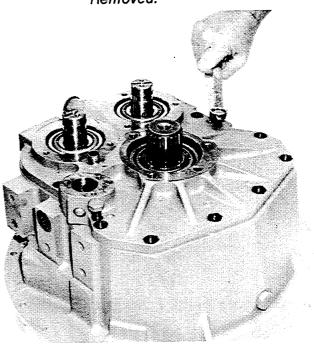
Using Pusher Screws to Remove Rear Cover.
